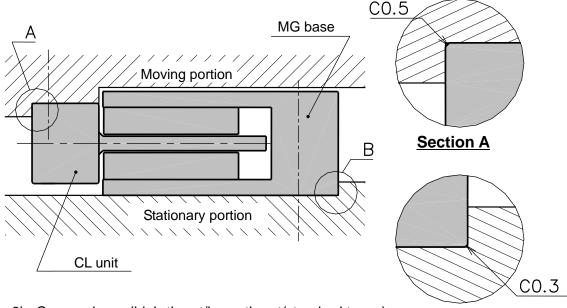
Corner shape (high-thrust/large-thrust/standard types)
